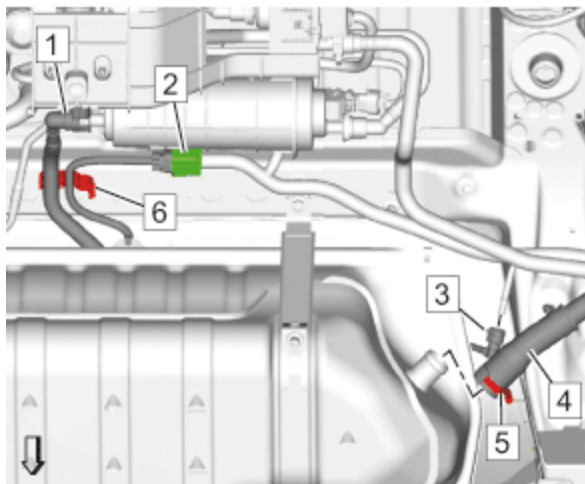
Evaporative Emission Rear Hose, Fuel Tank Filler Hose, Vent Pipe, Electrical Connector, Retainer And Clamp
